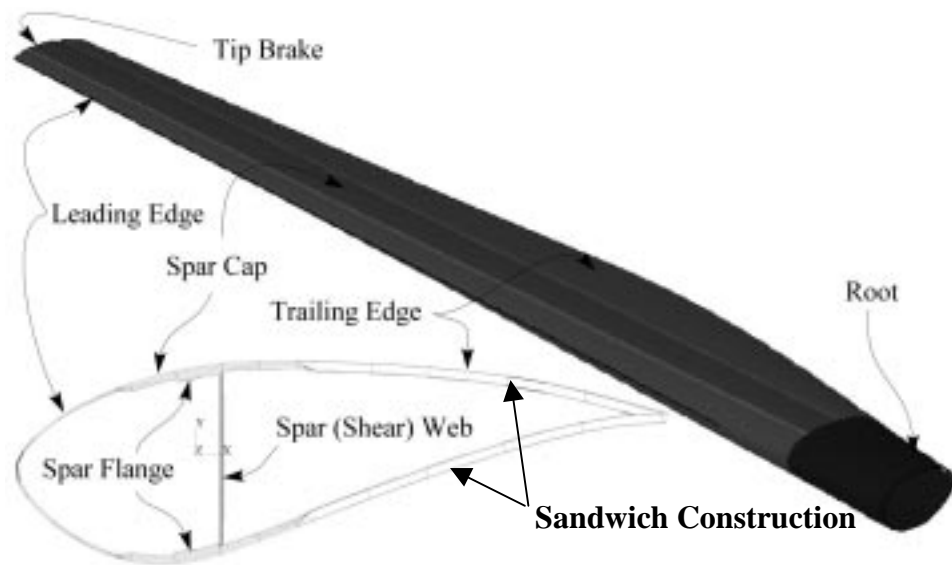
CAD drawing of the MSU fiberglass AOC15/50 wind turbine blade design with a cross section.
